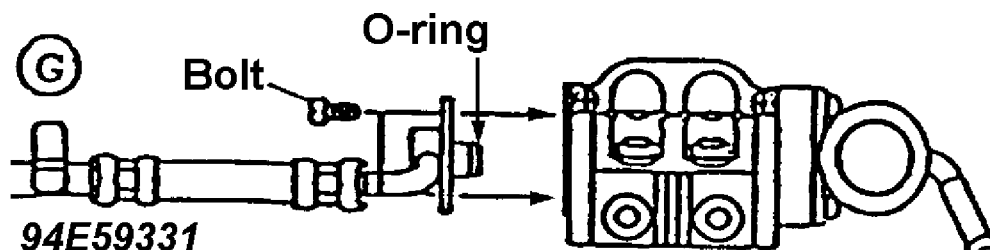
Installing Primary Fuel Distributor Outlet Modified Hose
